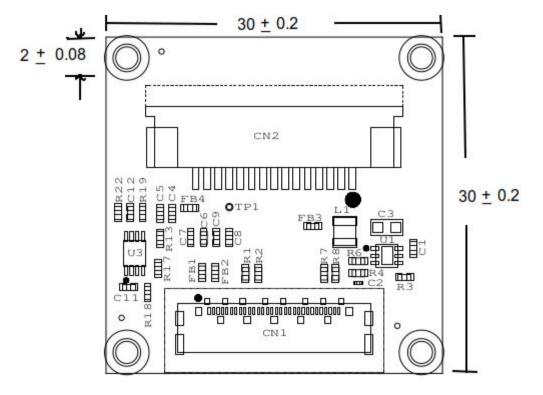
Front Portion of e-CAM23_CUNX Base Board Mechanical Dimensions
